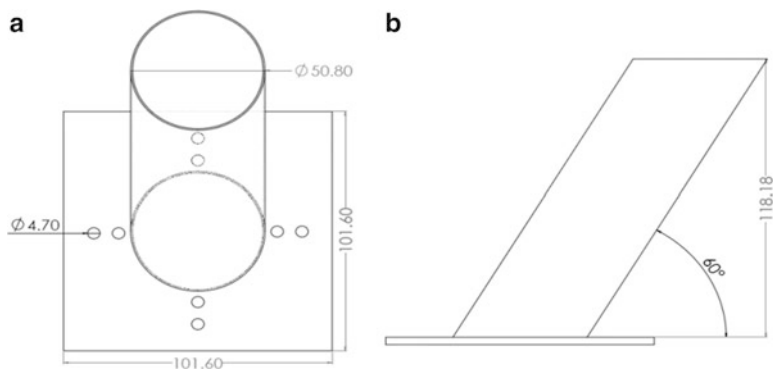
Schematic illustration of the joint design. (a) Front view. (b) Side view
